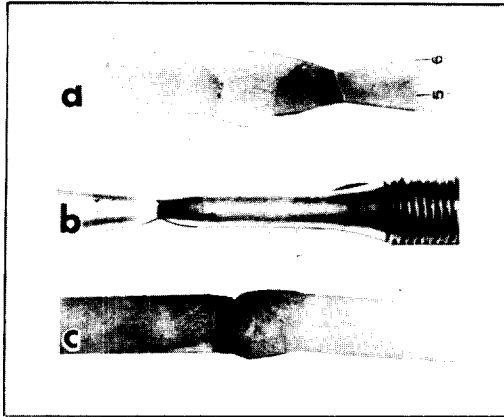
Fractured specimen after (a) tensile, (b) fatigue (without weld reinforcement) and, (c) fatigue (with weld reinforcement) test
